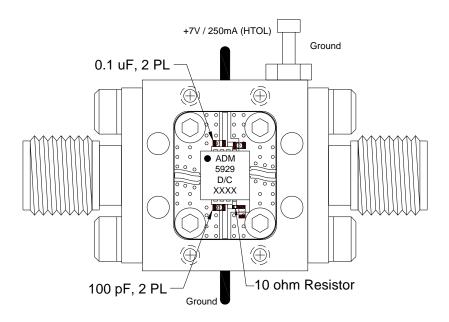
A mounted sample in a custom test fixture designed to facilitate HTOL test. Bias voltages used are shown.
